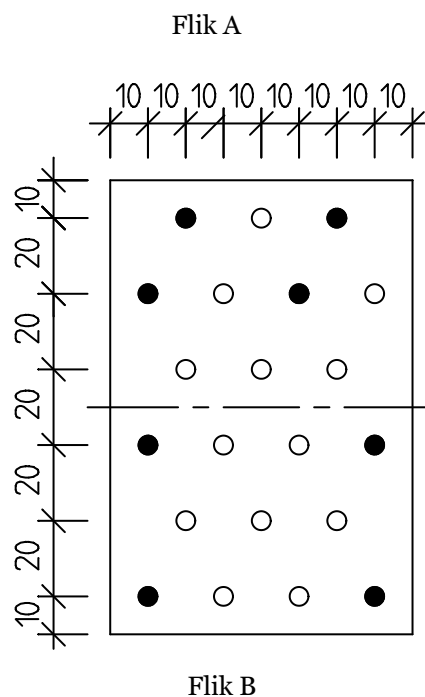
Dimensions of Angle Bracket type 1/60x60x2,0/2,5x80
